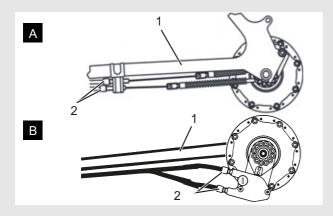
Adjusting sleeves (2) on two alternative versions (A and B) of a dual-cable, cable-operated gear shift on the chain stay (1)
